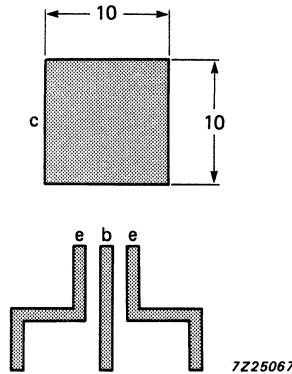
Single-sided 35 μm Cu-clad epoxy fibreglass printed circuit board; thickness 1.5 mm; tracks fully tin plated; Cu area shown shaded. (Dimensions in mm).
